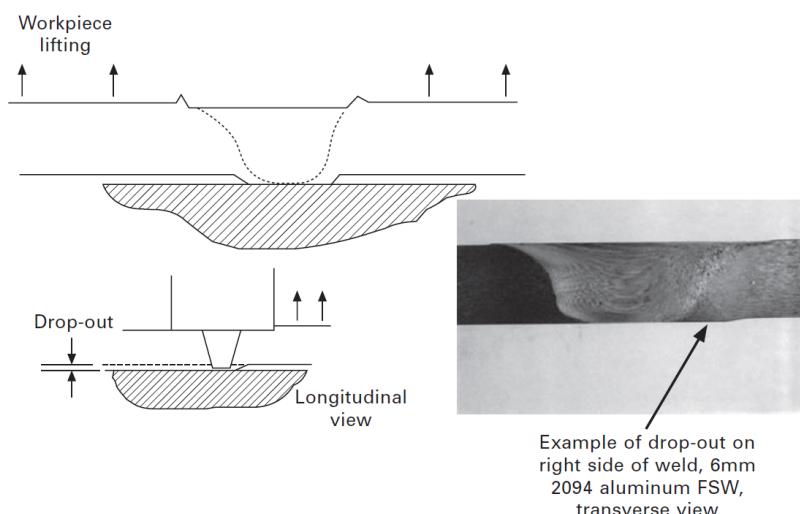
Drop-out in a butt weld produced by inadequate vertical holding force on the workpiece
